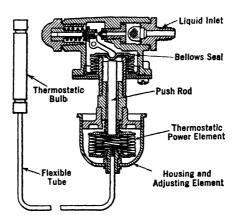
Pressure-reducing valve with thermostatic bulb.
